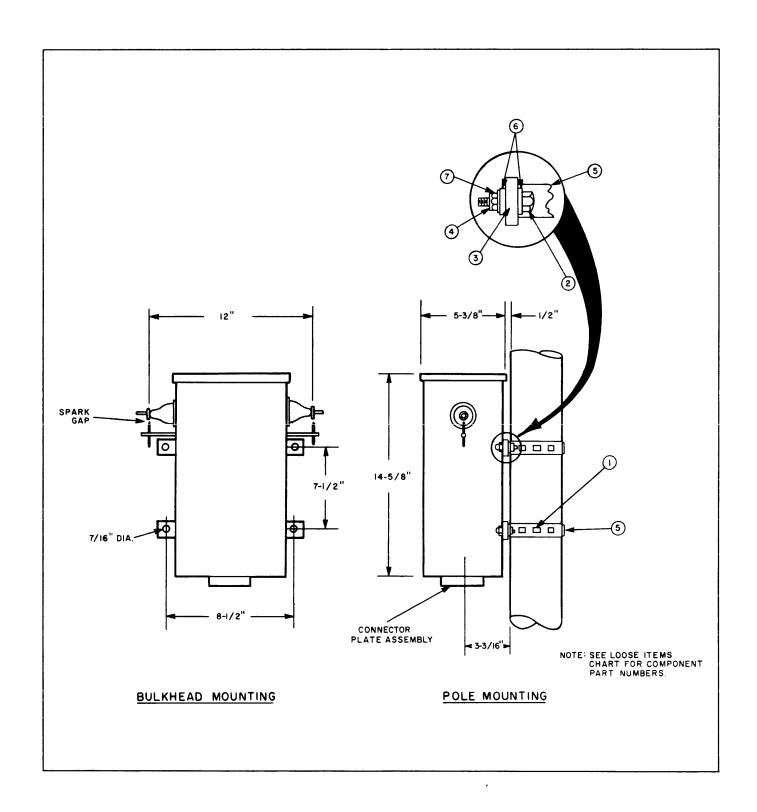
Model TRC-5000 Outline and Mounting Dimensions
